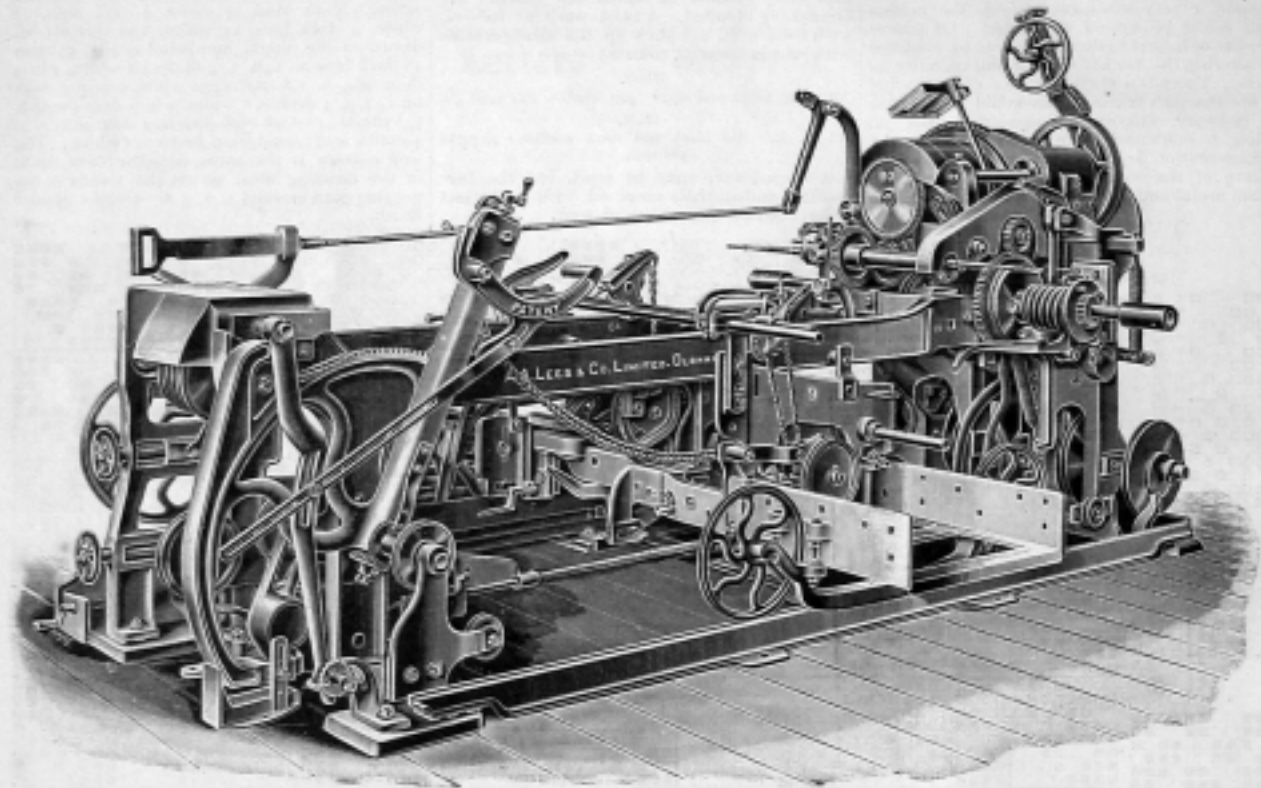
FIRST FRONT VIEW OF IMPROVED HEAD-STOCK.—MESSRS. ASA LEES AND CO., LIMITED, OLDHAM.
